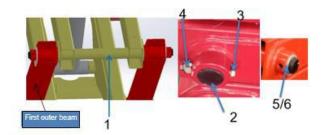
Installation of second layer fork1. Second inner arm assembly 2. Pin 3. Bolt 4.Nut 5. Washer 6. Retainer ring 7. Outer arm
